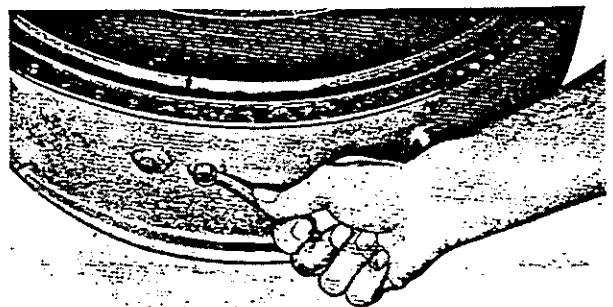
Removing Combustion Chamber Scoop and Shroud Bolts
